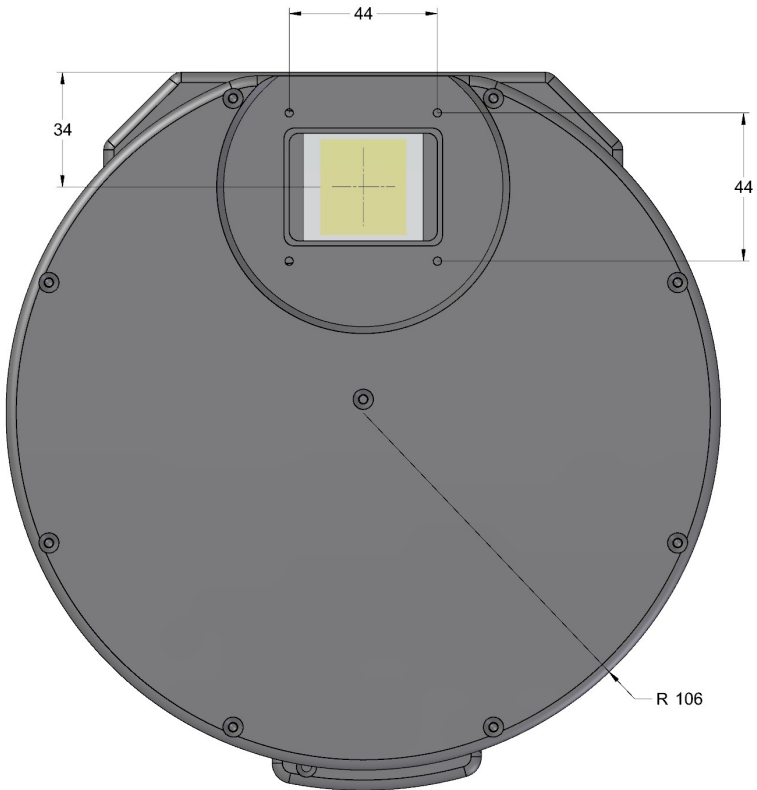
G3 camera front view (both standard and enhanced cooling) with “S” size external filter wheel
